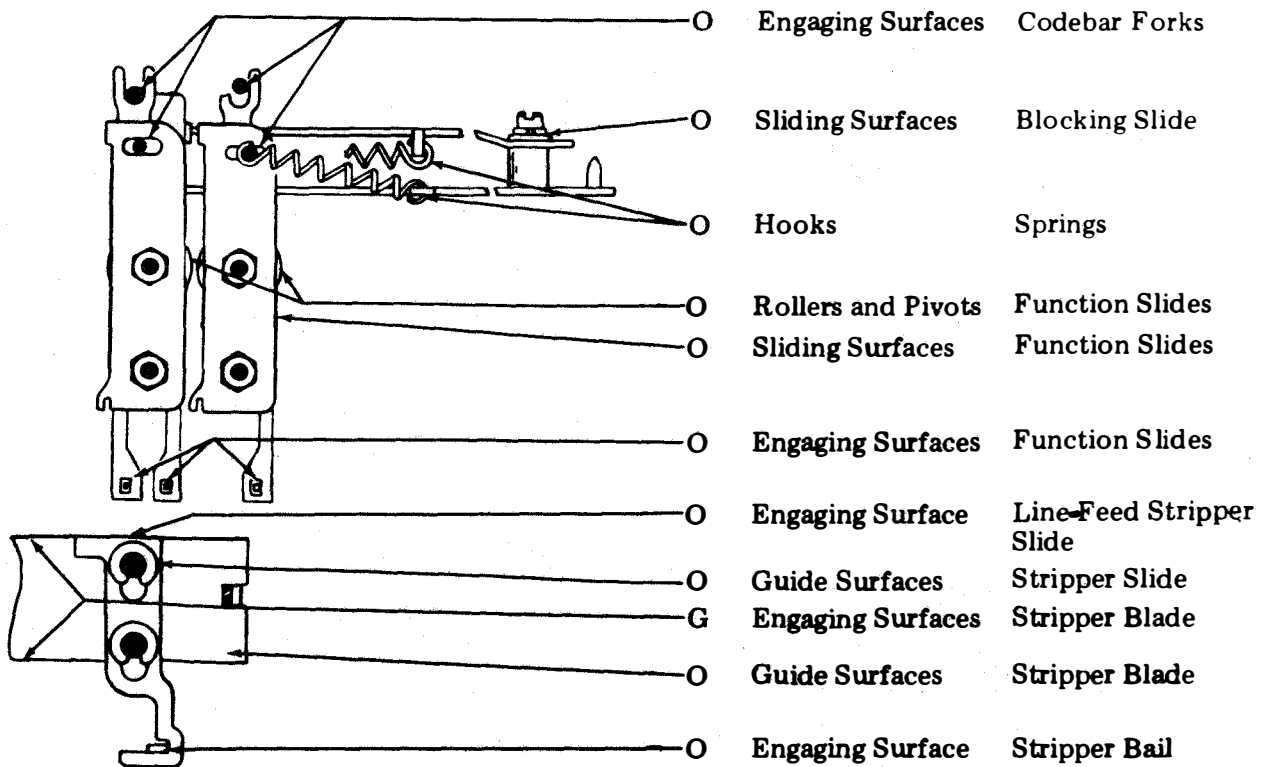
Shift and Stripper Bail Mechanisms, Rear View
